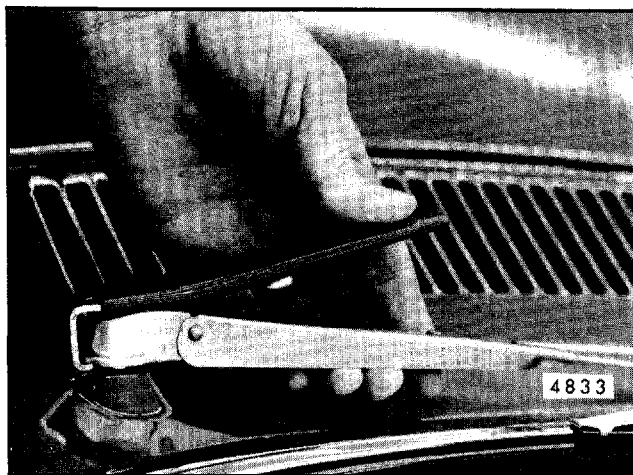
Wiper Arm Removal Tool J-8966 (or Equivalent)
